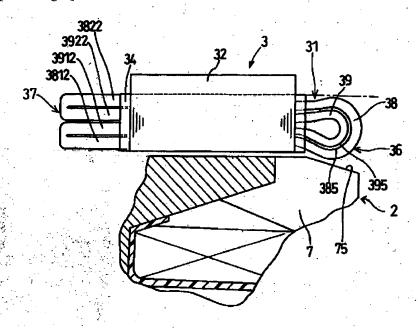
It is the side elevation of the bending equipment which carries out the bending process shown in drawing 7 - drawing 10 in which bending and showing move mechanisms, such as a member.
